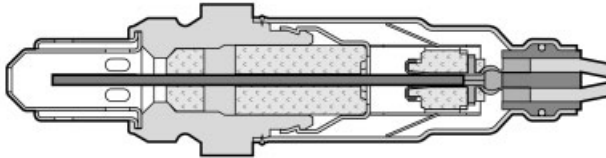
Assembly of exhaust-gas oxygen sensors
